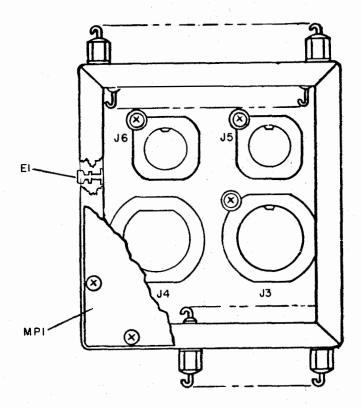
Interlock Switch Assembly A1MP14, Component Locations
